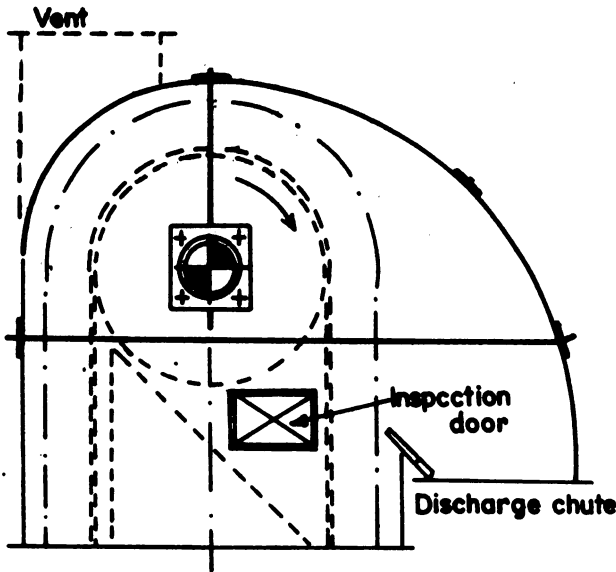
Diagram of bucket elevator head section and to provide required torque carrying capacity. The shaft must be level. Anti-friction and properly lubricated bearings should be used.
